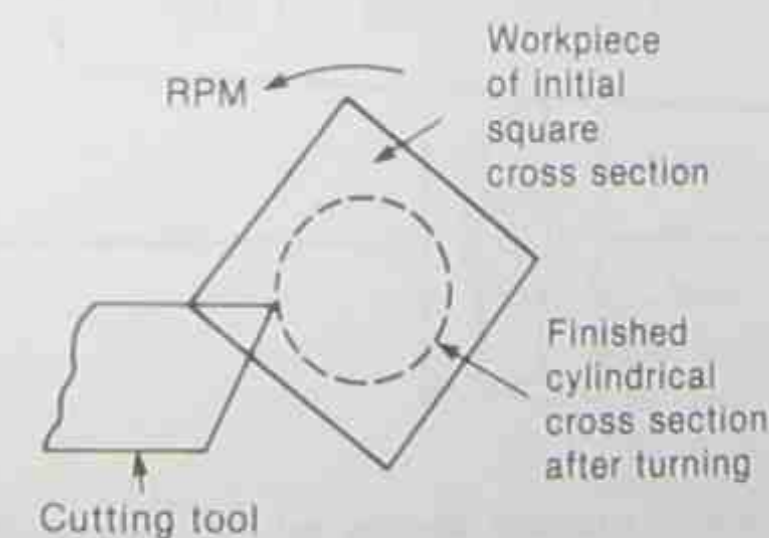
Turning an initially square workpiece to produce a cylindrical surface.
